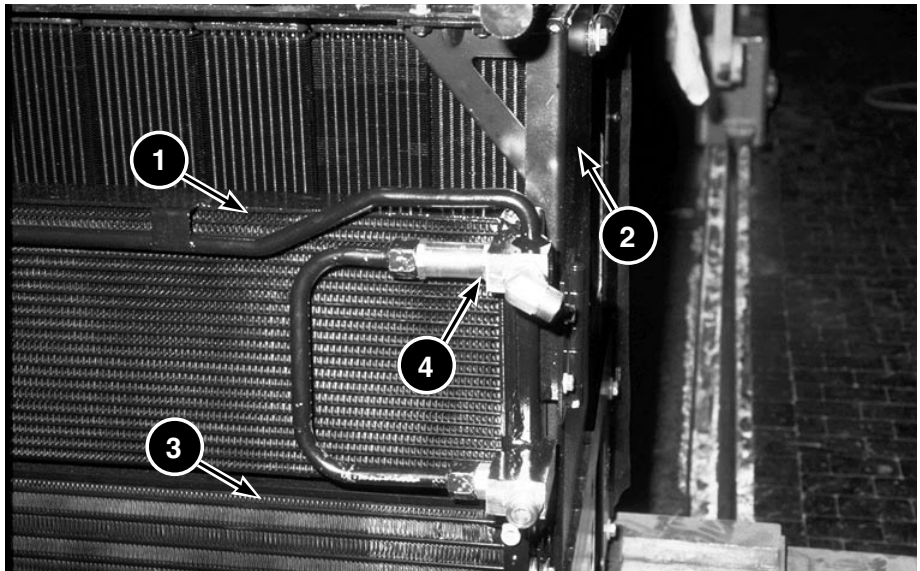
Fan Drive Oil Cooler and Oil Cooler Bypass
